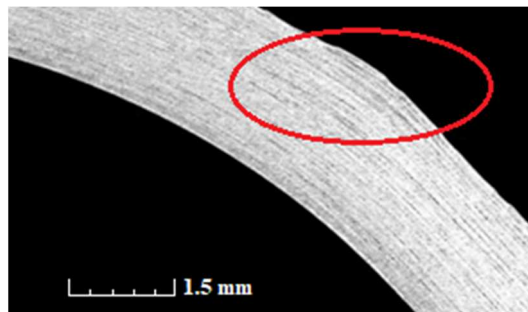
Wrinkle on outer surface of TP specimen with 90° angle and 12 mm inner radius
